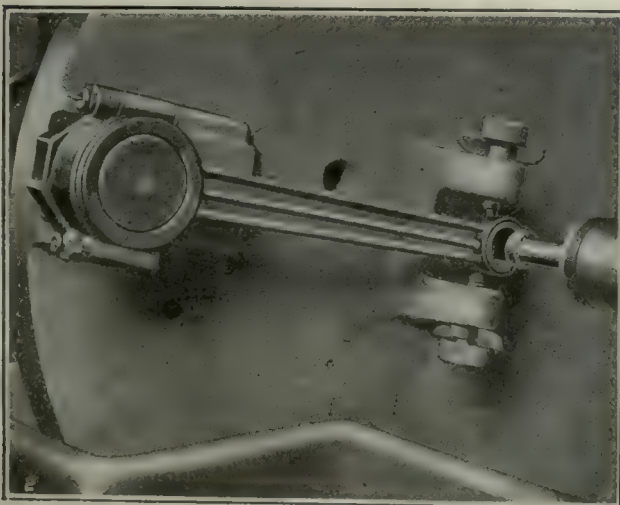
FIXTURE FOR GRINDING CONNECTING ROD BUSHINGS. FIG. 3—GRINDING STEERING KNUCKLE BALLS
